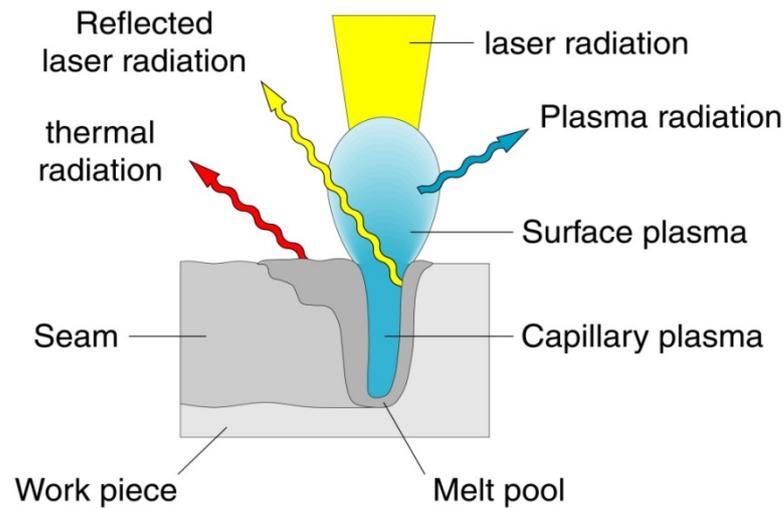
Overview of the electromagnetic emissions during laser beam welding.
